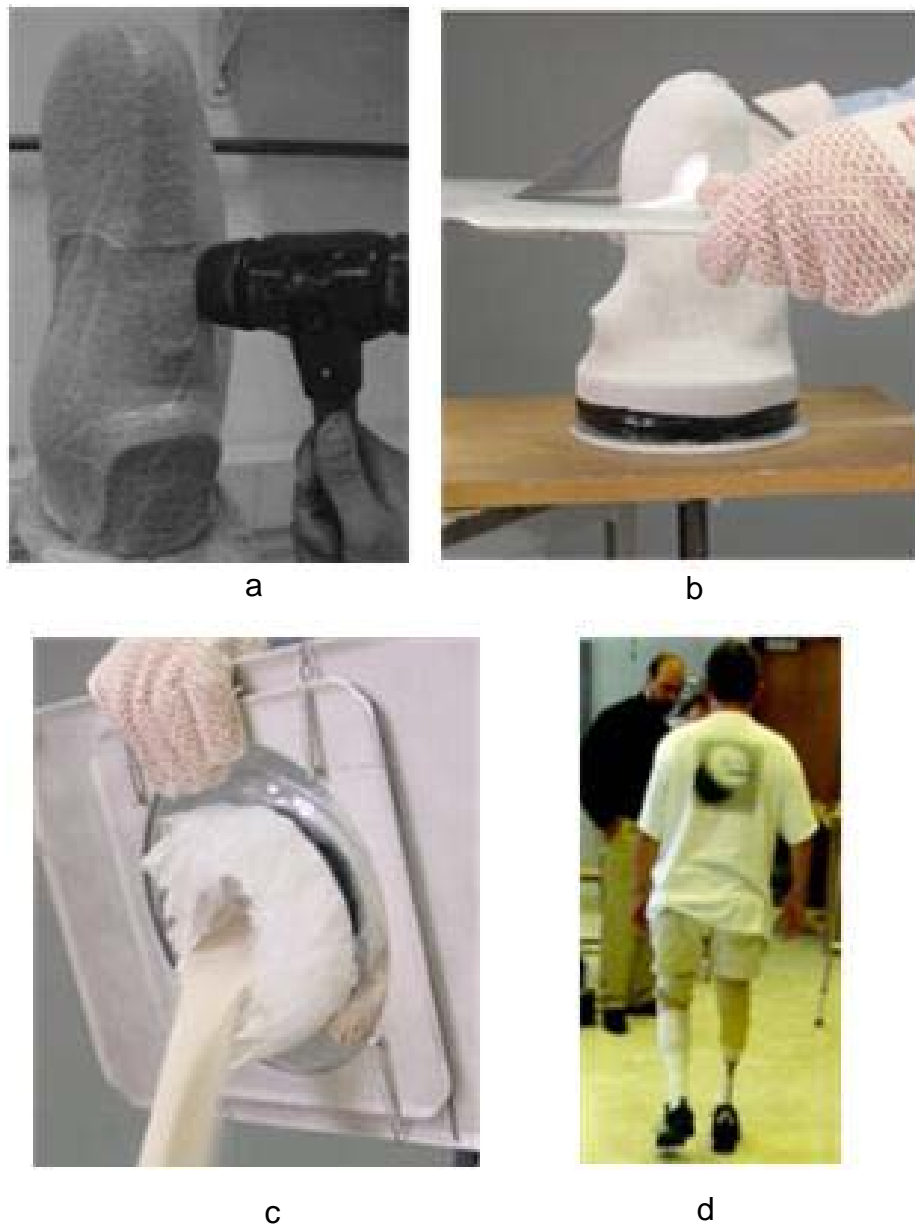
TT socket moulding from Sand Casted Model (a) Indentations of sand cast model is made by hammering (b) Thermoplastic vacuum forming of sand cast model (c) Demoulding by simply pour the sand out (d) Walking with prosthesis made according to SCM
